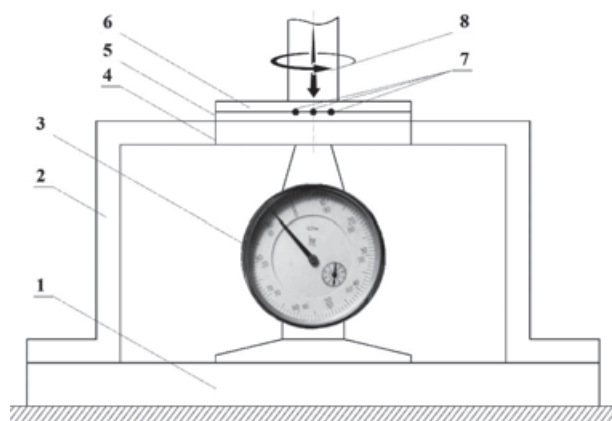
Schematic representation of equipment for research: 1 — base plate; 2 — table; 3 — device for measuring the strength of the pressure; 4 — moving plate; 5 — thermal isolator; 6 — welding plates; 7 — thermocouples; 8 — work tool
